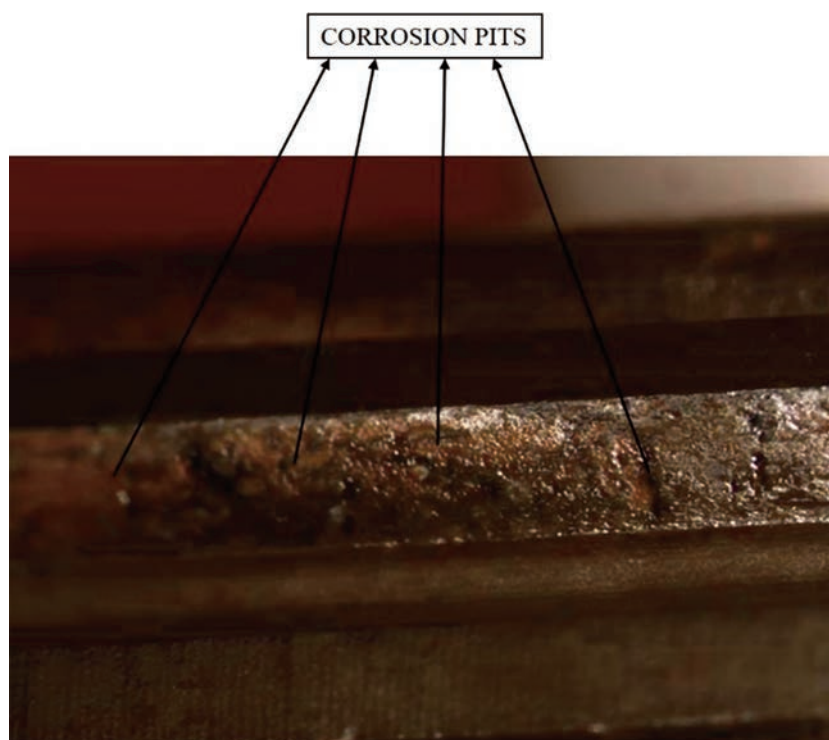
The Corrosion Pits Formed in the Fritting Section.
